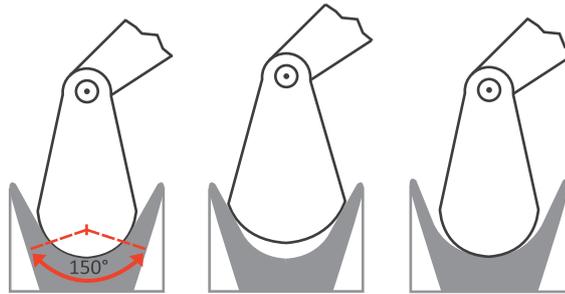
GROOVES INSPECTION: CORRECT SIZE, NARROW AND LARGE GROOVE
